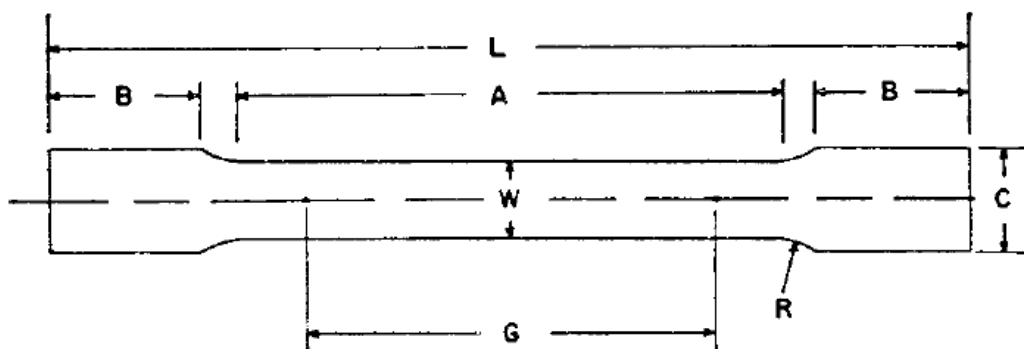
Standard Dimensions to create tensile shape for sheet metal
